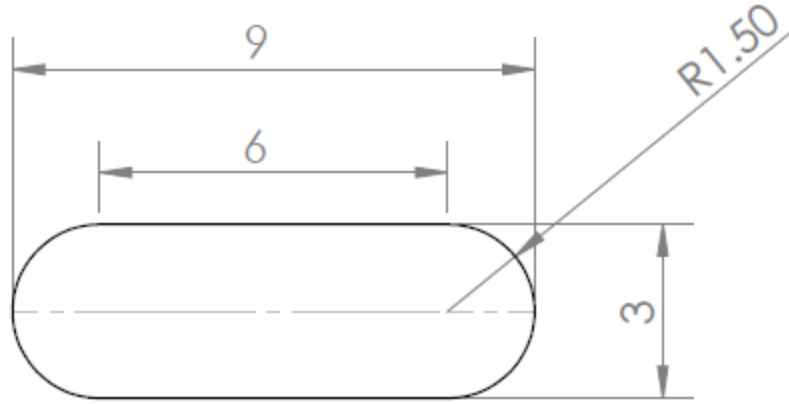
Geometry of Typical Bead Deposited by Baylor LAAM Printer, Dimensions are in mm
